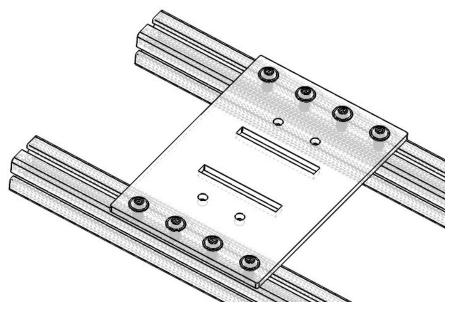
Fixture base plate (#KGTP) fixed on the two beam (#HJXQ) with end feed fasteners
